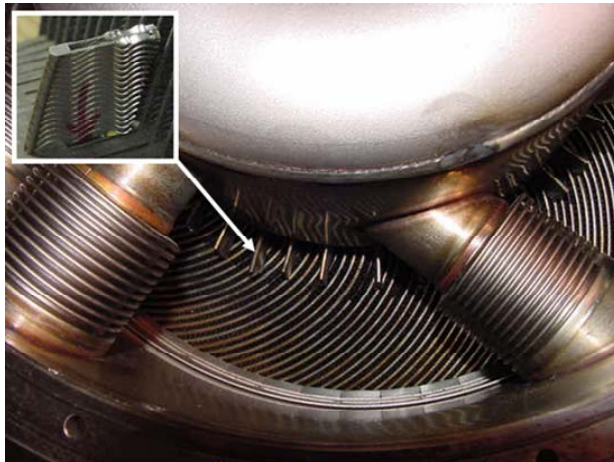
Steady-state elevated TET engine testing - Tack-welded sample shown inset [1].
